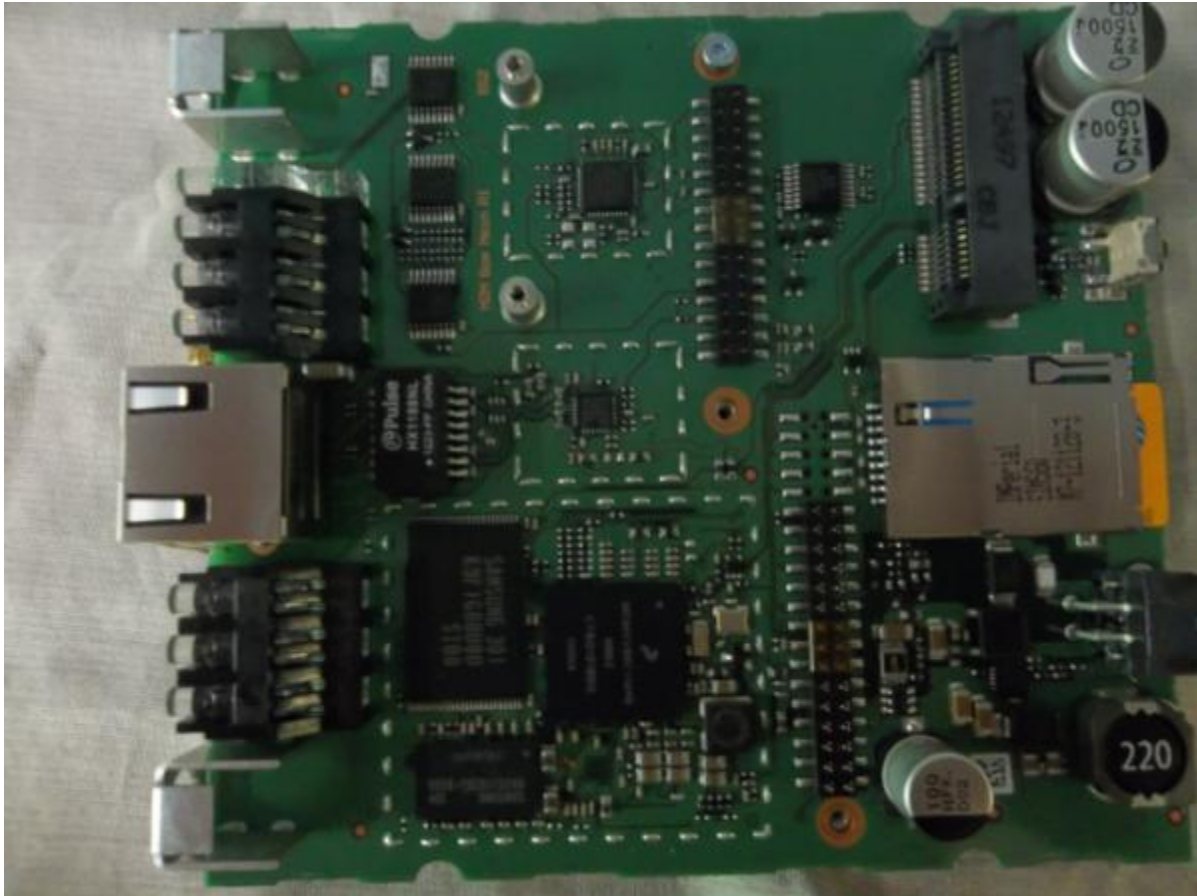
Top of Circuit Board #1 with Circuit Board #2 Removed
